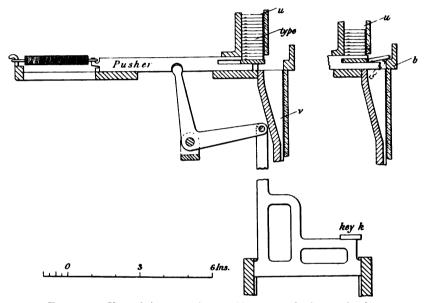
Kastenbein composing machine ; lype-freeing mechanism.
